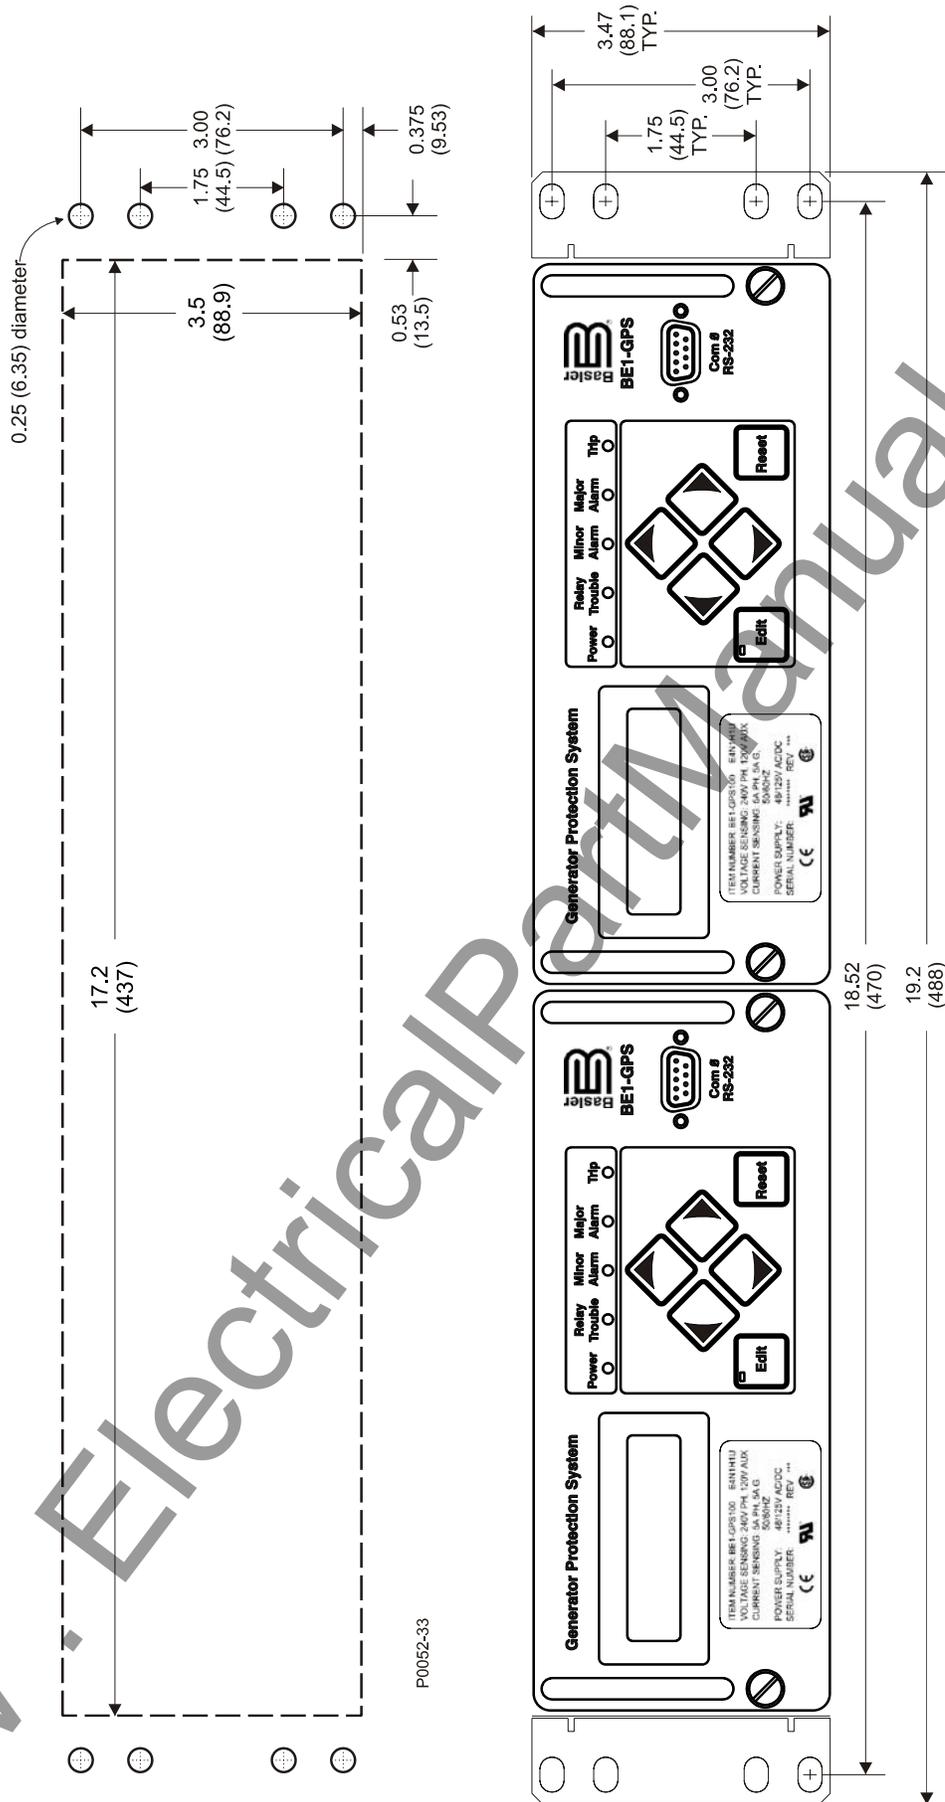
Mounting Dimensions for Panel Mounting Two H1 Relays without and Escutcheon Plate
